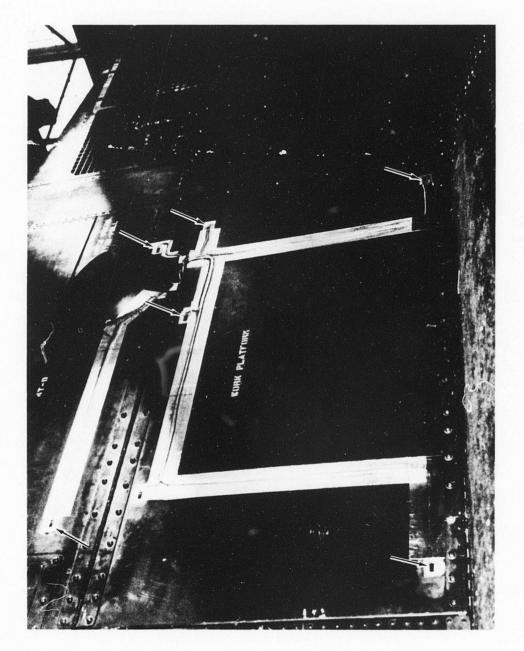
Flight Vibratory Load Survey, Strain Gage Locations, Work Platform.
